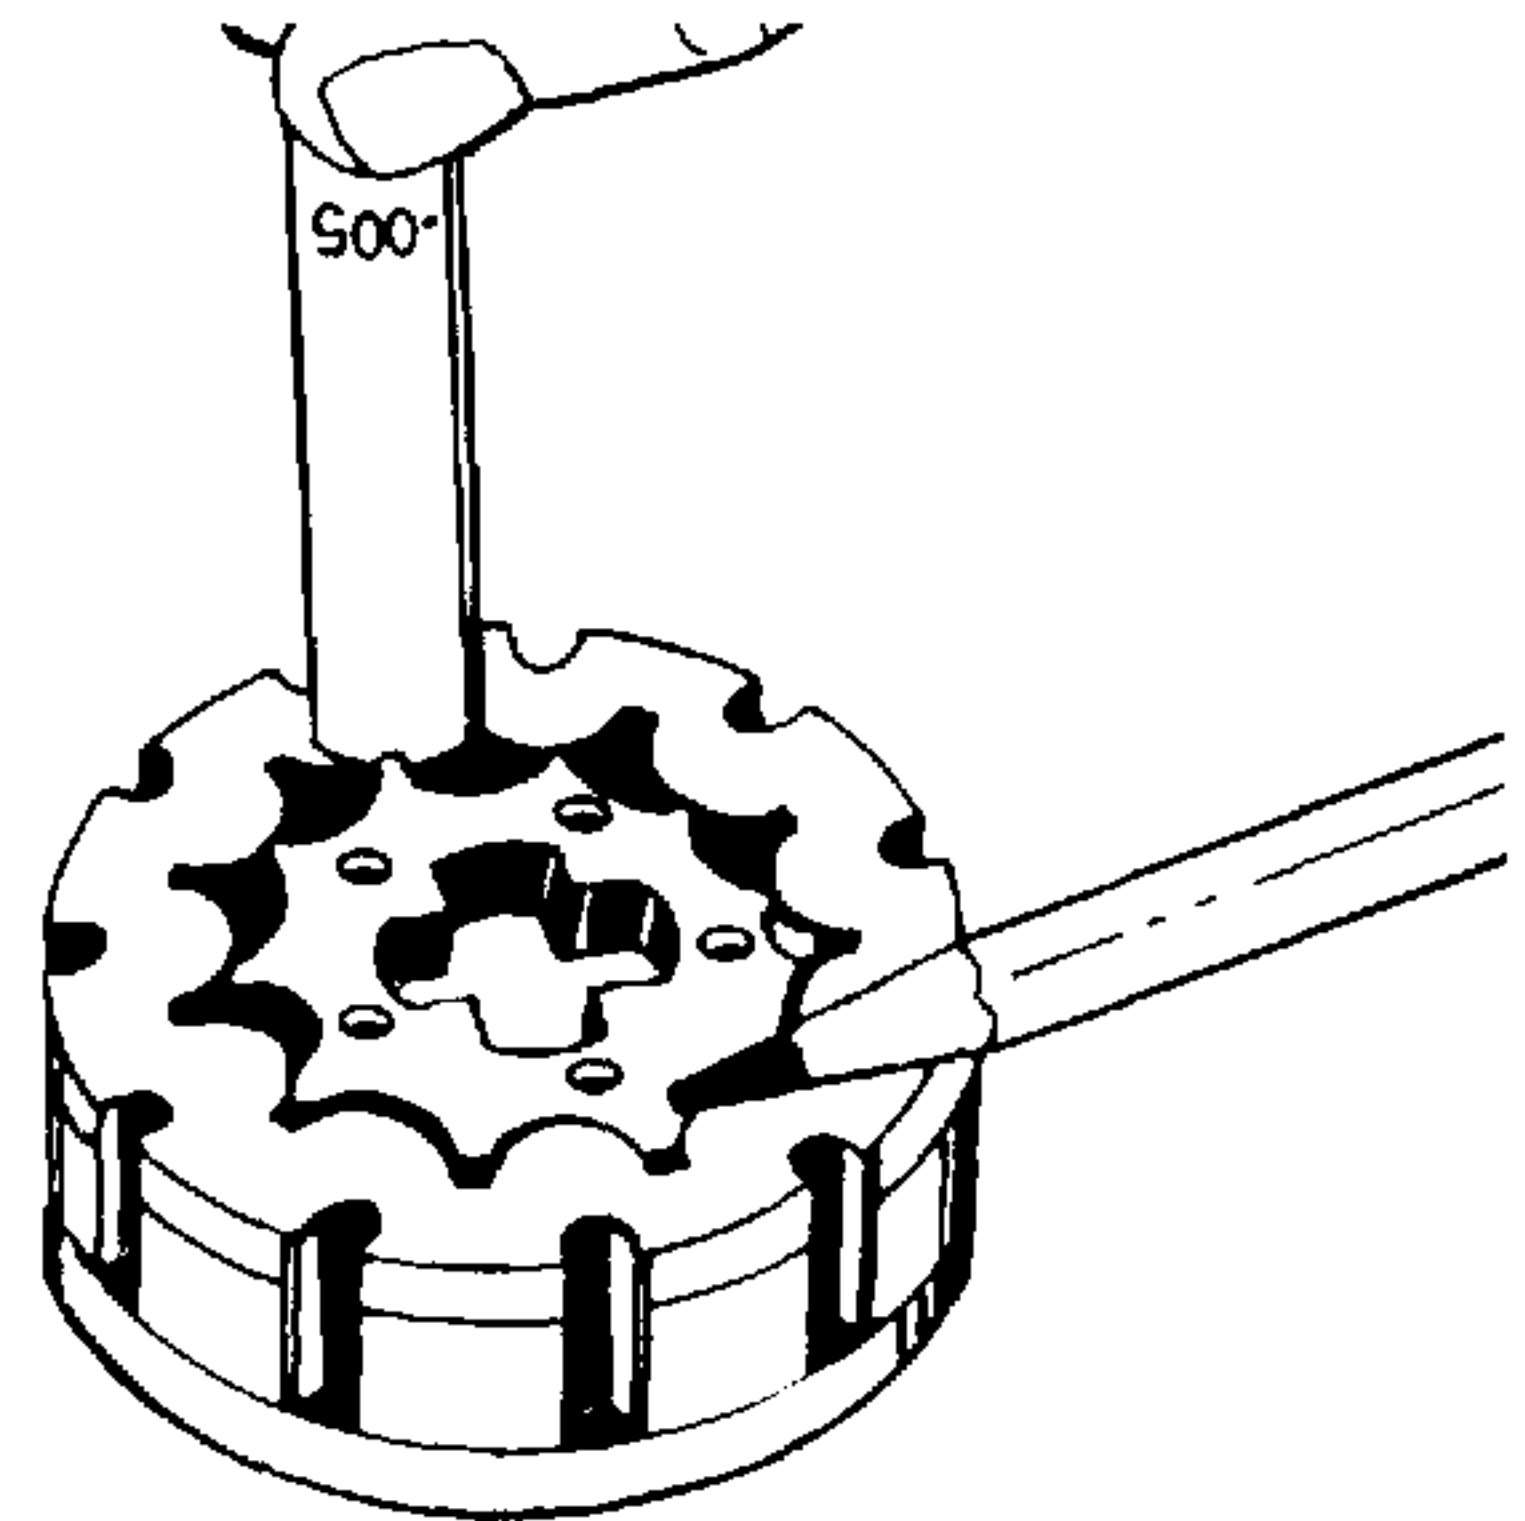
Checking Rotor to Stator "Tip" Clearance.
